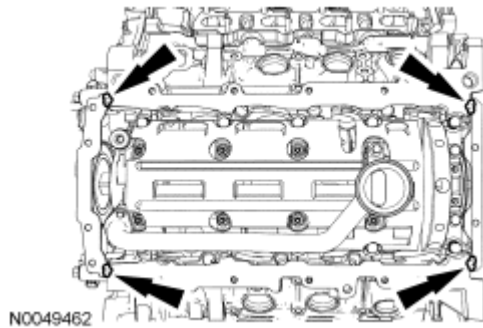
Applying Silicone Gasket & Sealant At Engine Front Cover-To-Cylinder Block Sealing Joints
